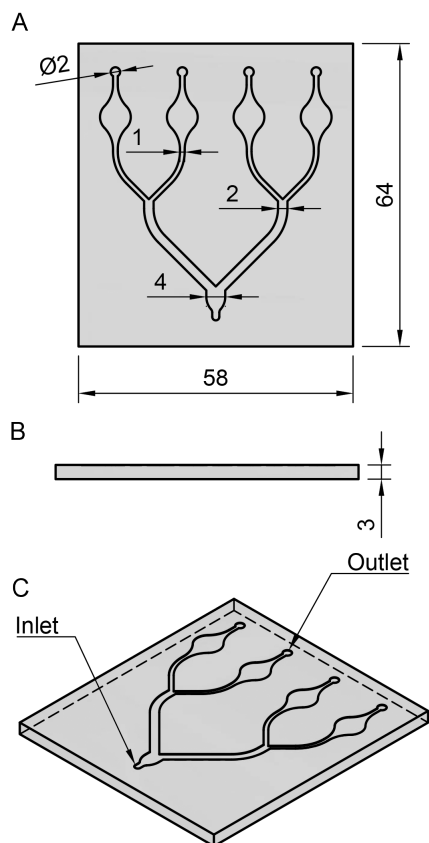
The fluidics part of V2.0 device. A) The top down view, B) the side view, C) the overview. The dimensions provided in mm.
